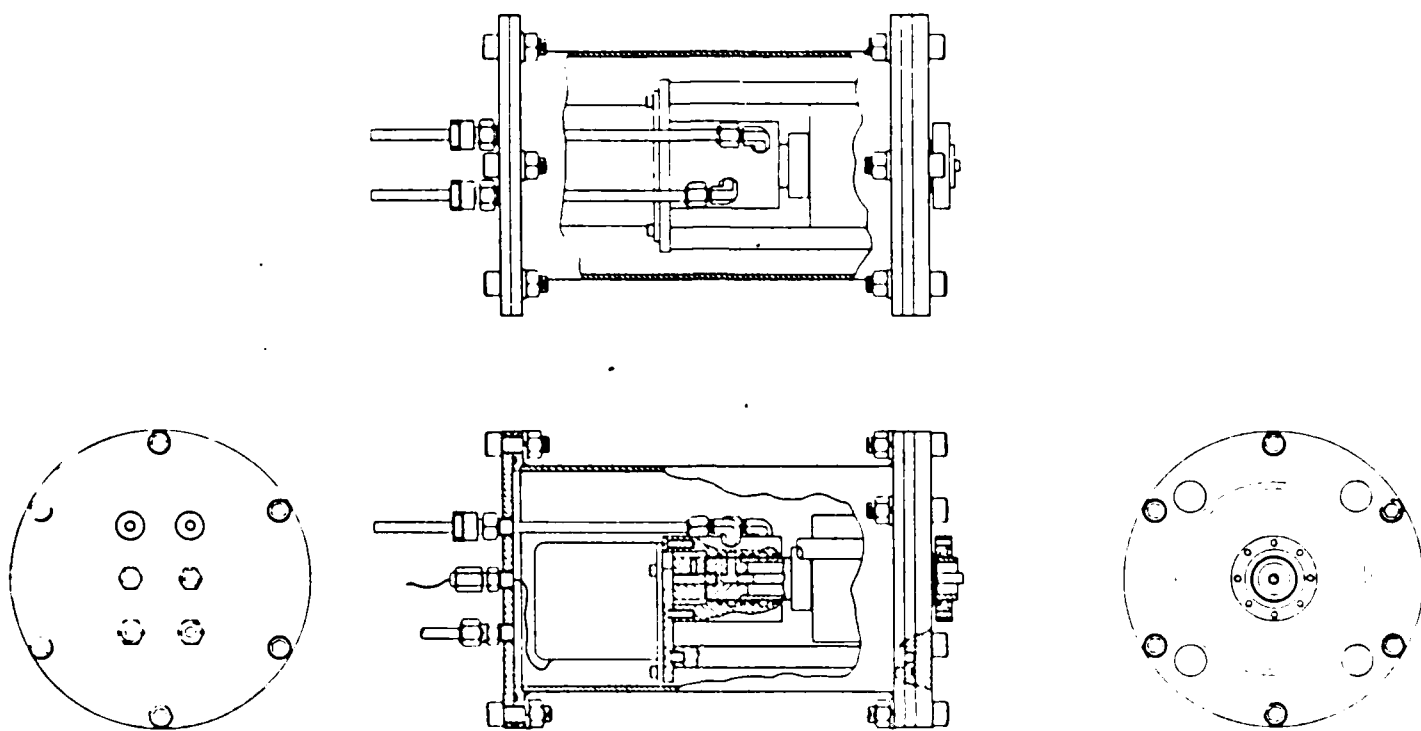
ROTARY DRIVE MECHANISM.
